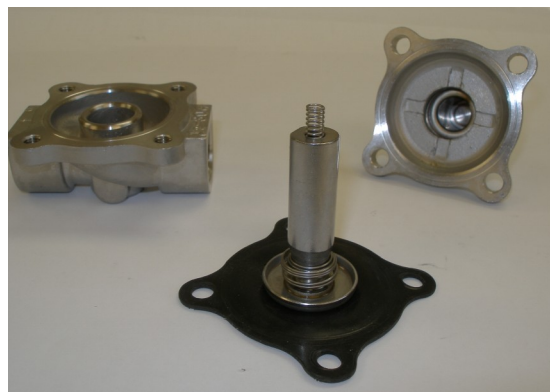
Direct acting valve with all components shown. Debris on the plunger may lead to valve malfunction.
